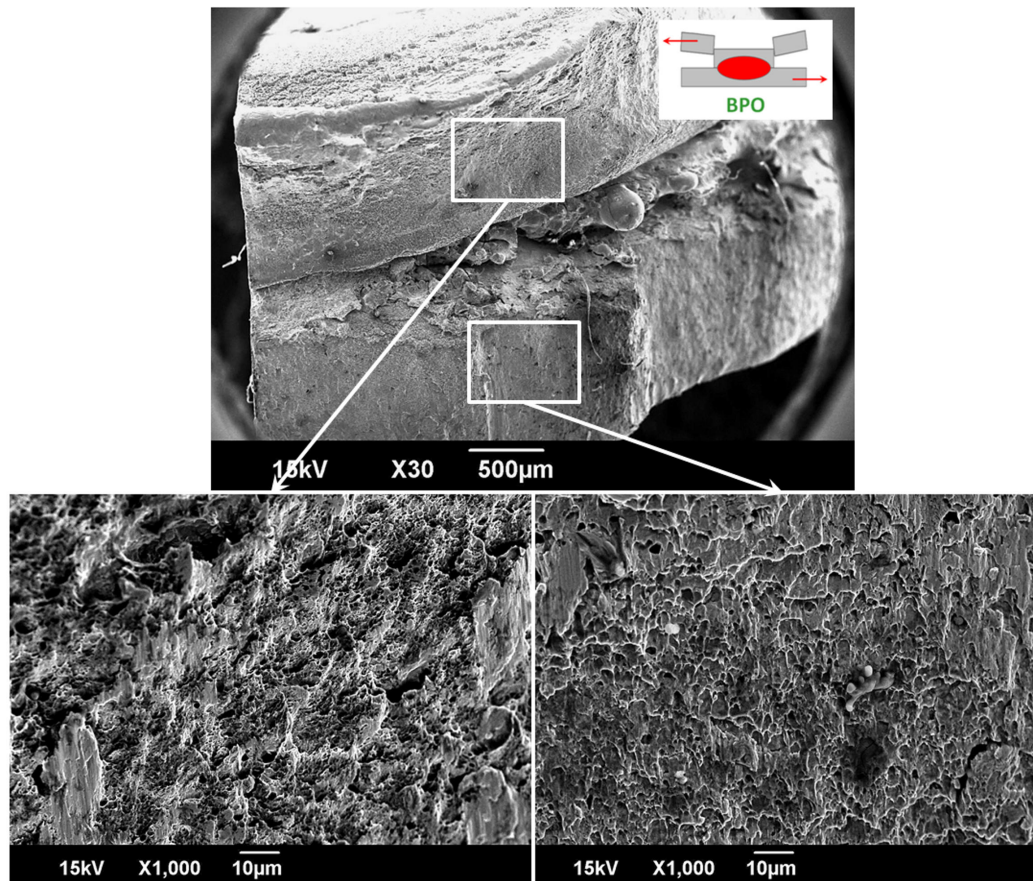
Scanning Electron Microscopy (SEM) fracture surfaces in tensile shear of Button Pull-Out failure mode.
